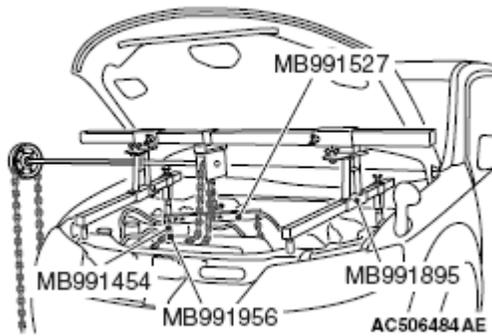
Identifying Special Tool Engine Hanger (MB991454 Or MB991995)
